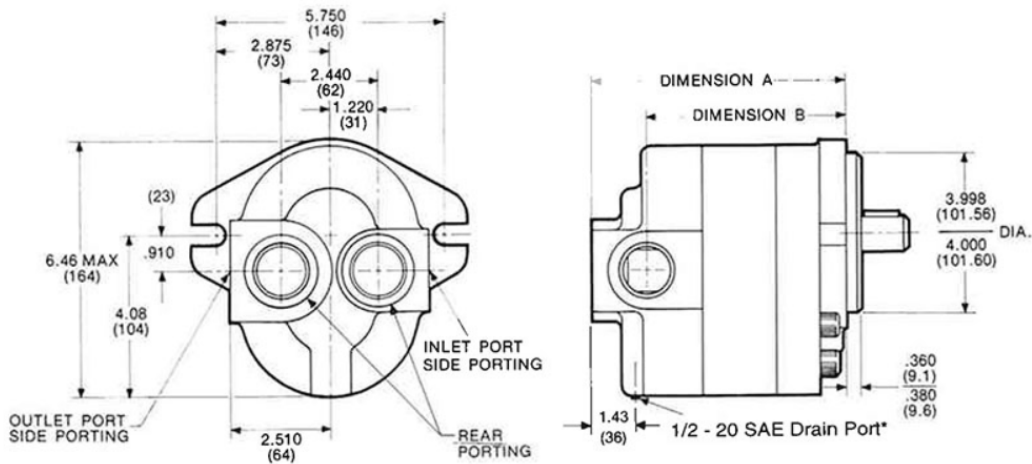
2D Drawing of 50 Series Hydraulic Motor (Part No. 50MH38DBCSC) Used in Rotation System Provided by Cross Manufacturing
